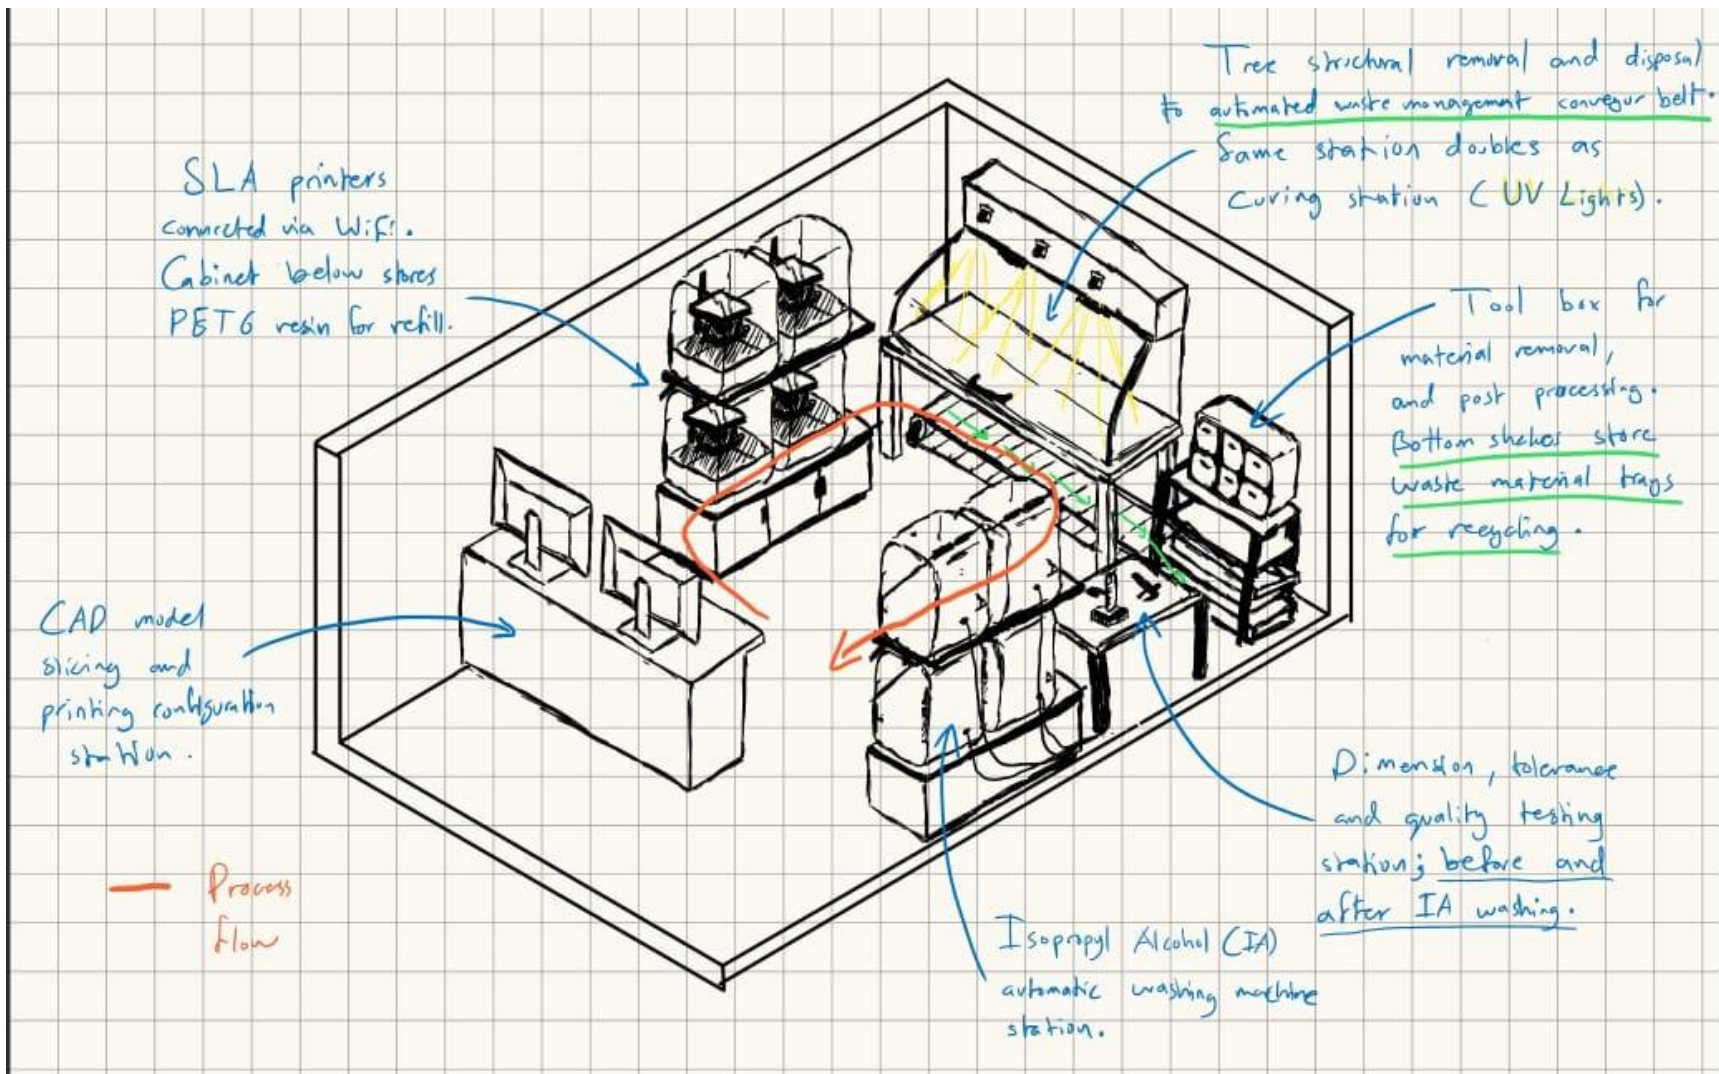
SLA additive manufacturing facility layout labelled sketch.
